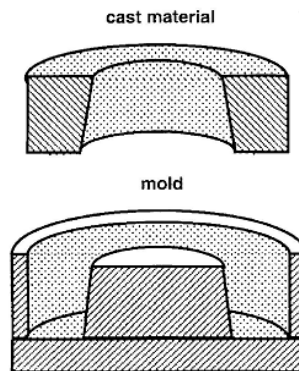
Ring Mould to Assess Hot Tearing [51]
